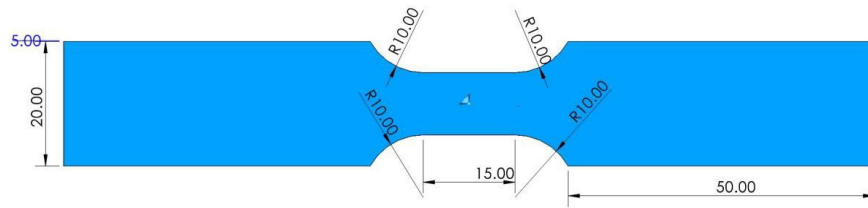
Dimensional details of the fatigue test specimen as per E606M
